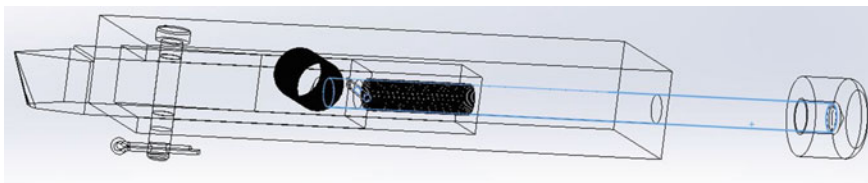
Stopper mechanism in wireframe view (Design 2)
